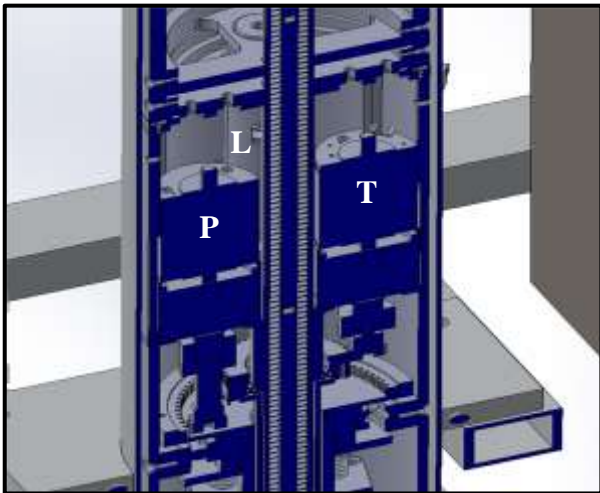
The linear actuator L (only one is visible) between the T and P motors. Note also the matured eccentric gearbox. The auger design is not representative of the auger as built.
